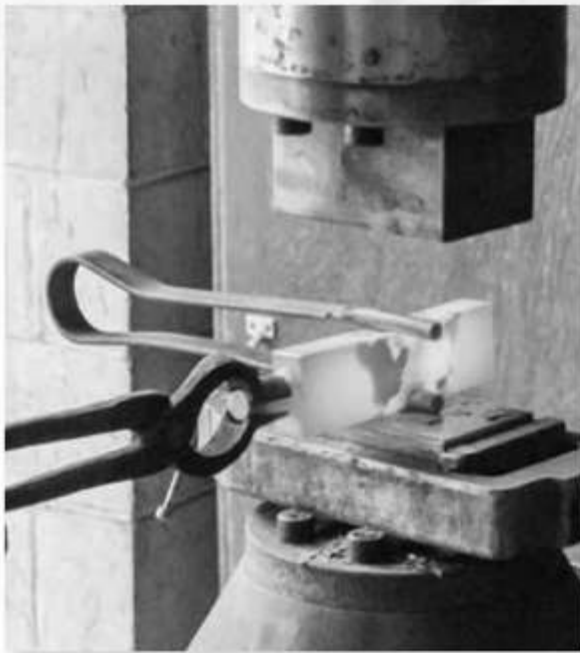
Using a spring fuller with a power hammer to mark off where the handle begins, at roughly midway on the bar.
